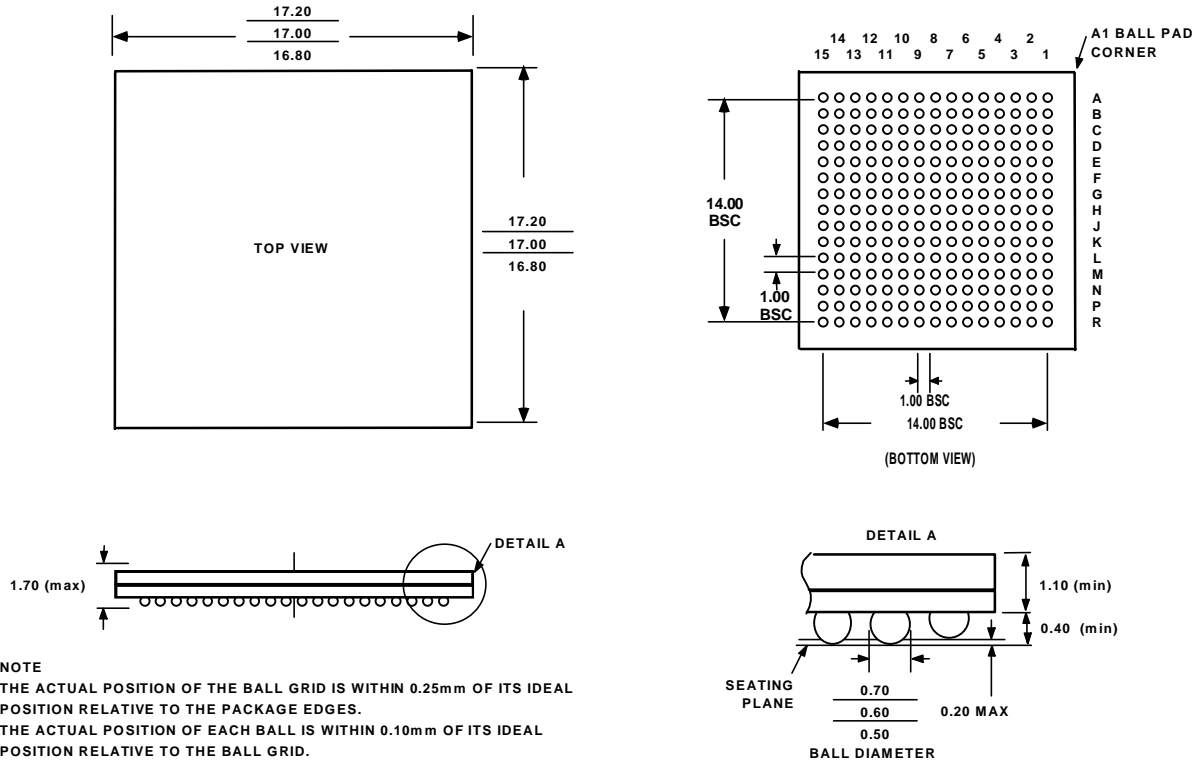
Package Dimensions Metric 17mm × 17mm, 225 ball MBGA
